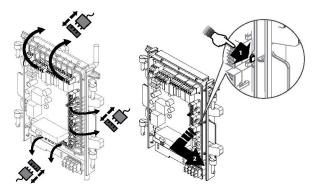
Prestige Solo & Excellence - Removal of old PCB
